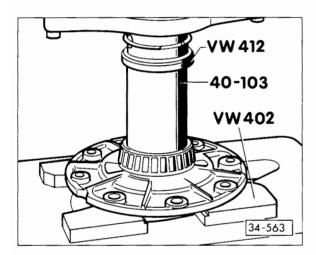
Heat inner race of tapered roller bearing to about 100° C, install and press home
